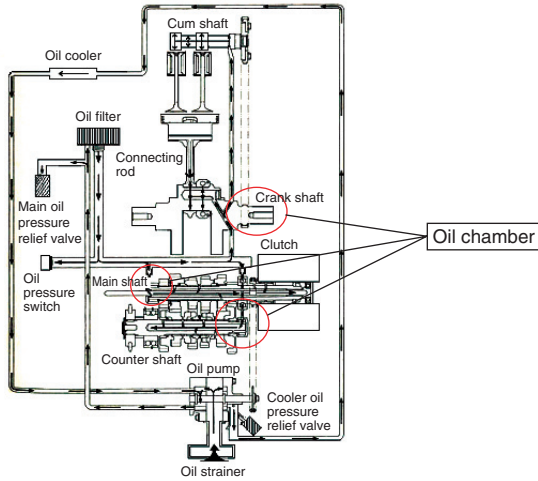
Schematic drawing of oil circulation for four-stroke engine
